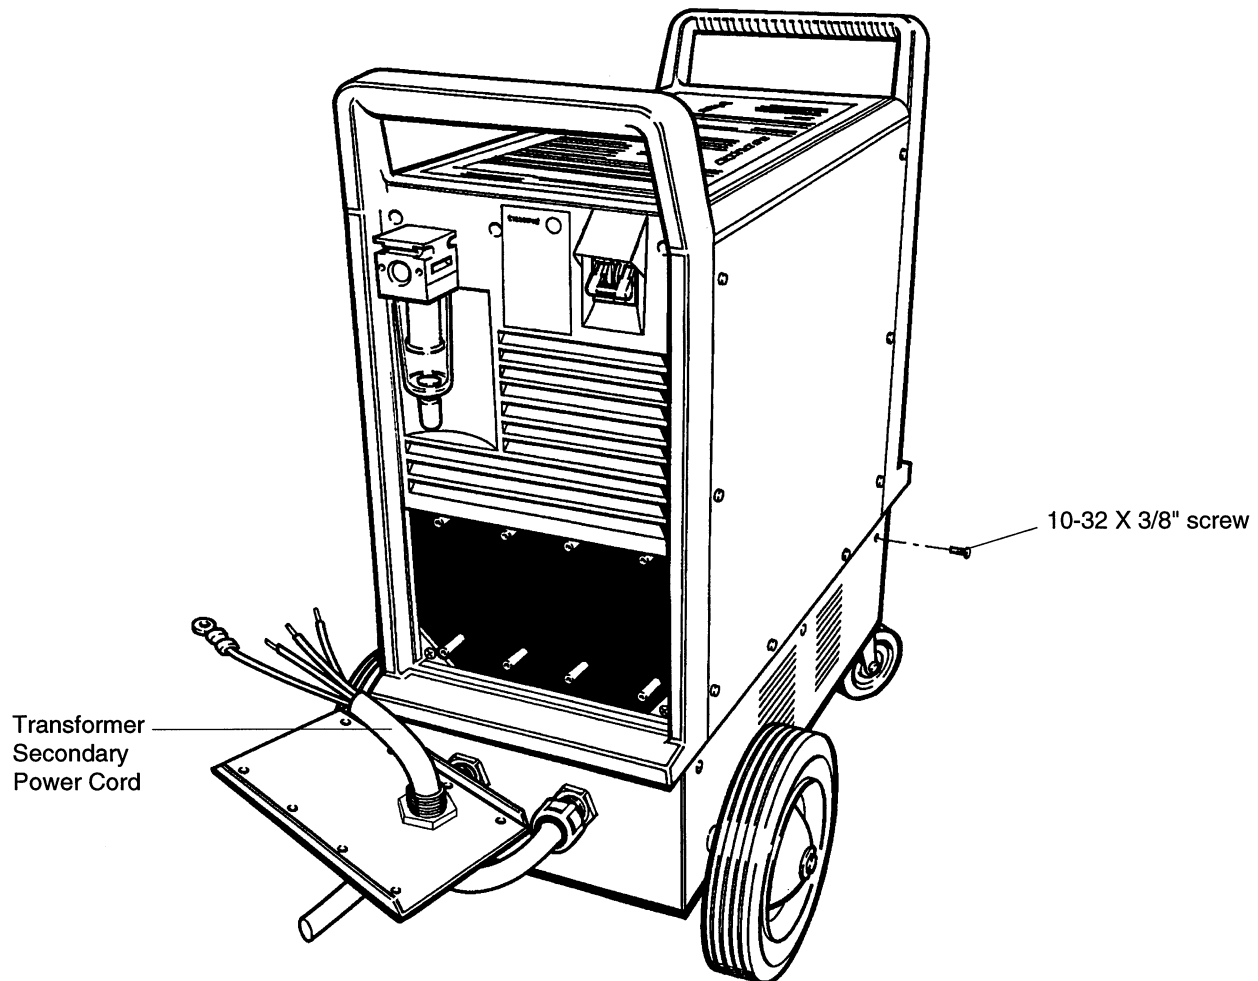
Attaching 600V Transformer Case Assembly to Powermax1100 Chassis
